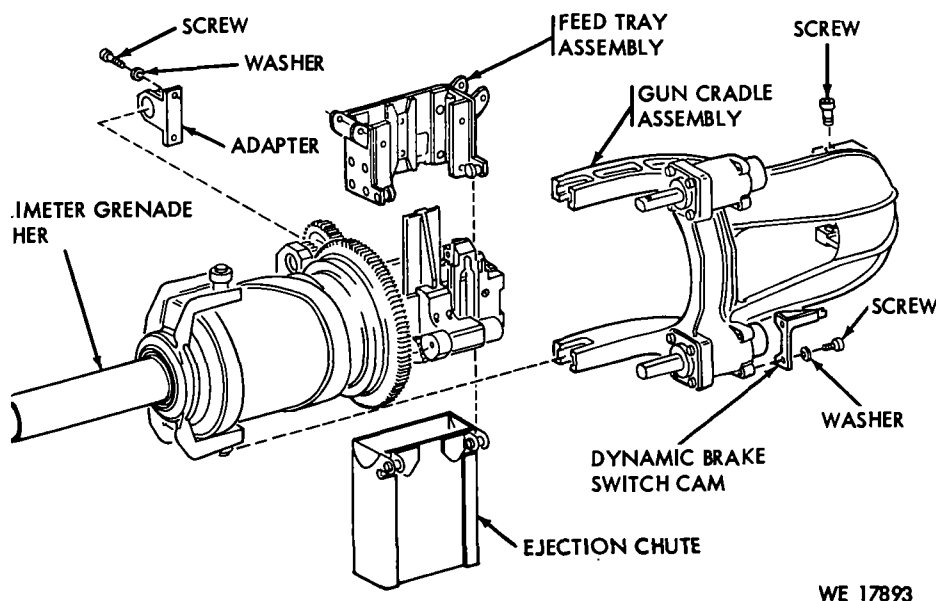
Installation/removal of accessory assemblies on right-40mm grenade launcher XM129.
